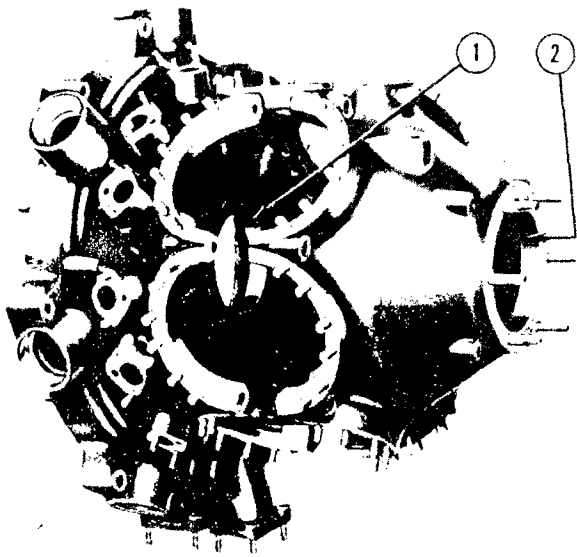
Crankcase Sections Showing Pressed-in Bronze Main Bearing Liners, Cage and Thrust Bearing Recess
